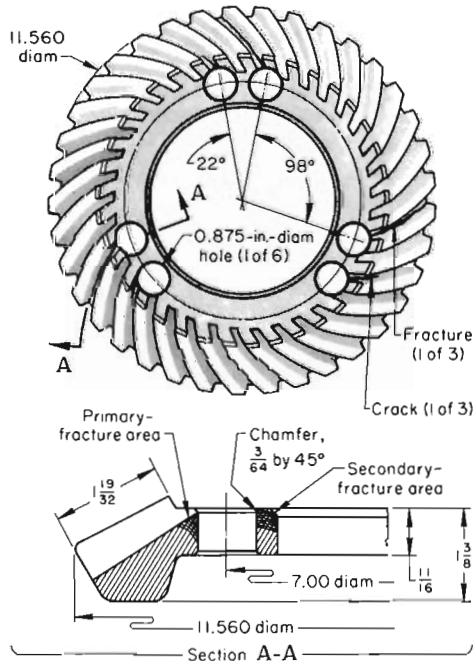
Carburized spiral bevel gear fractured from fatigue originating at the acute angle intersection of the root fillet to the bolt hole.⁵
